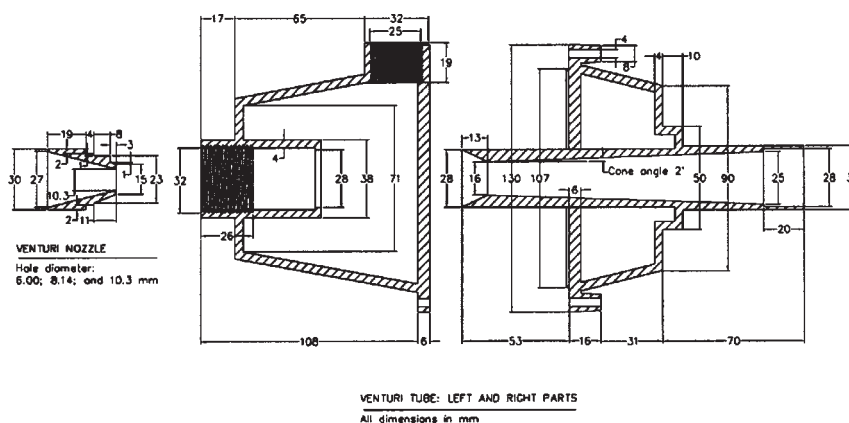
Cross-section drawing of main parts of the venturi tube and a venturi nozzle.
